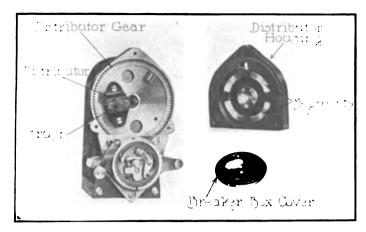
Conventional Type of Magneto Employing a Wipe Contact—The Distributor Housing is Displaced to Show the Segments.
